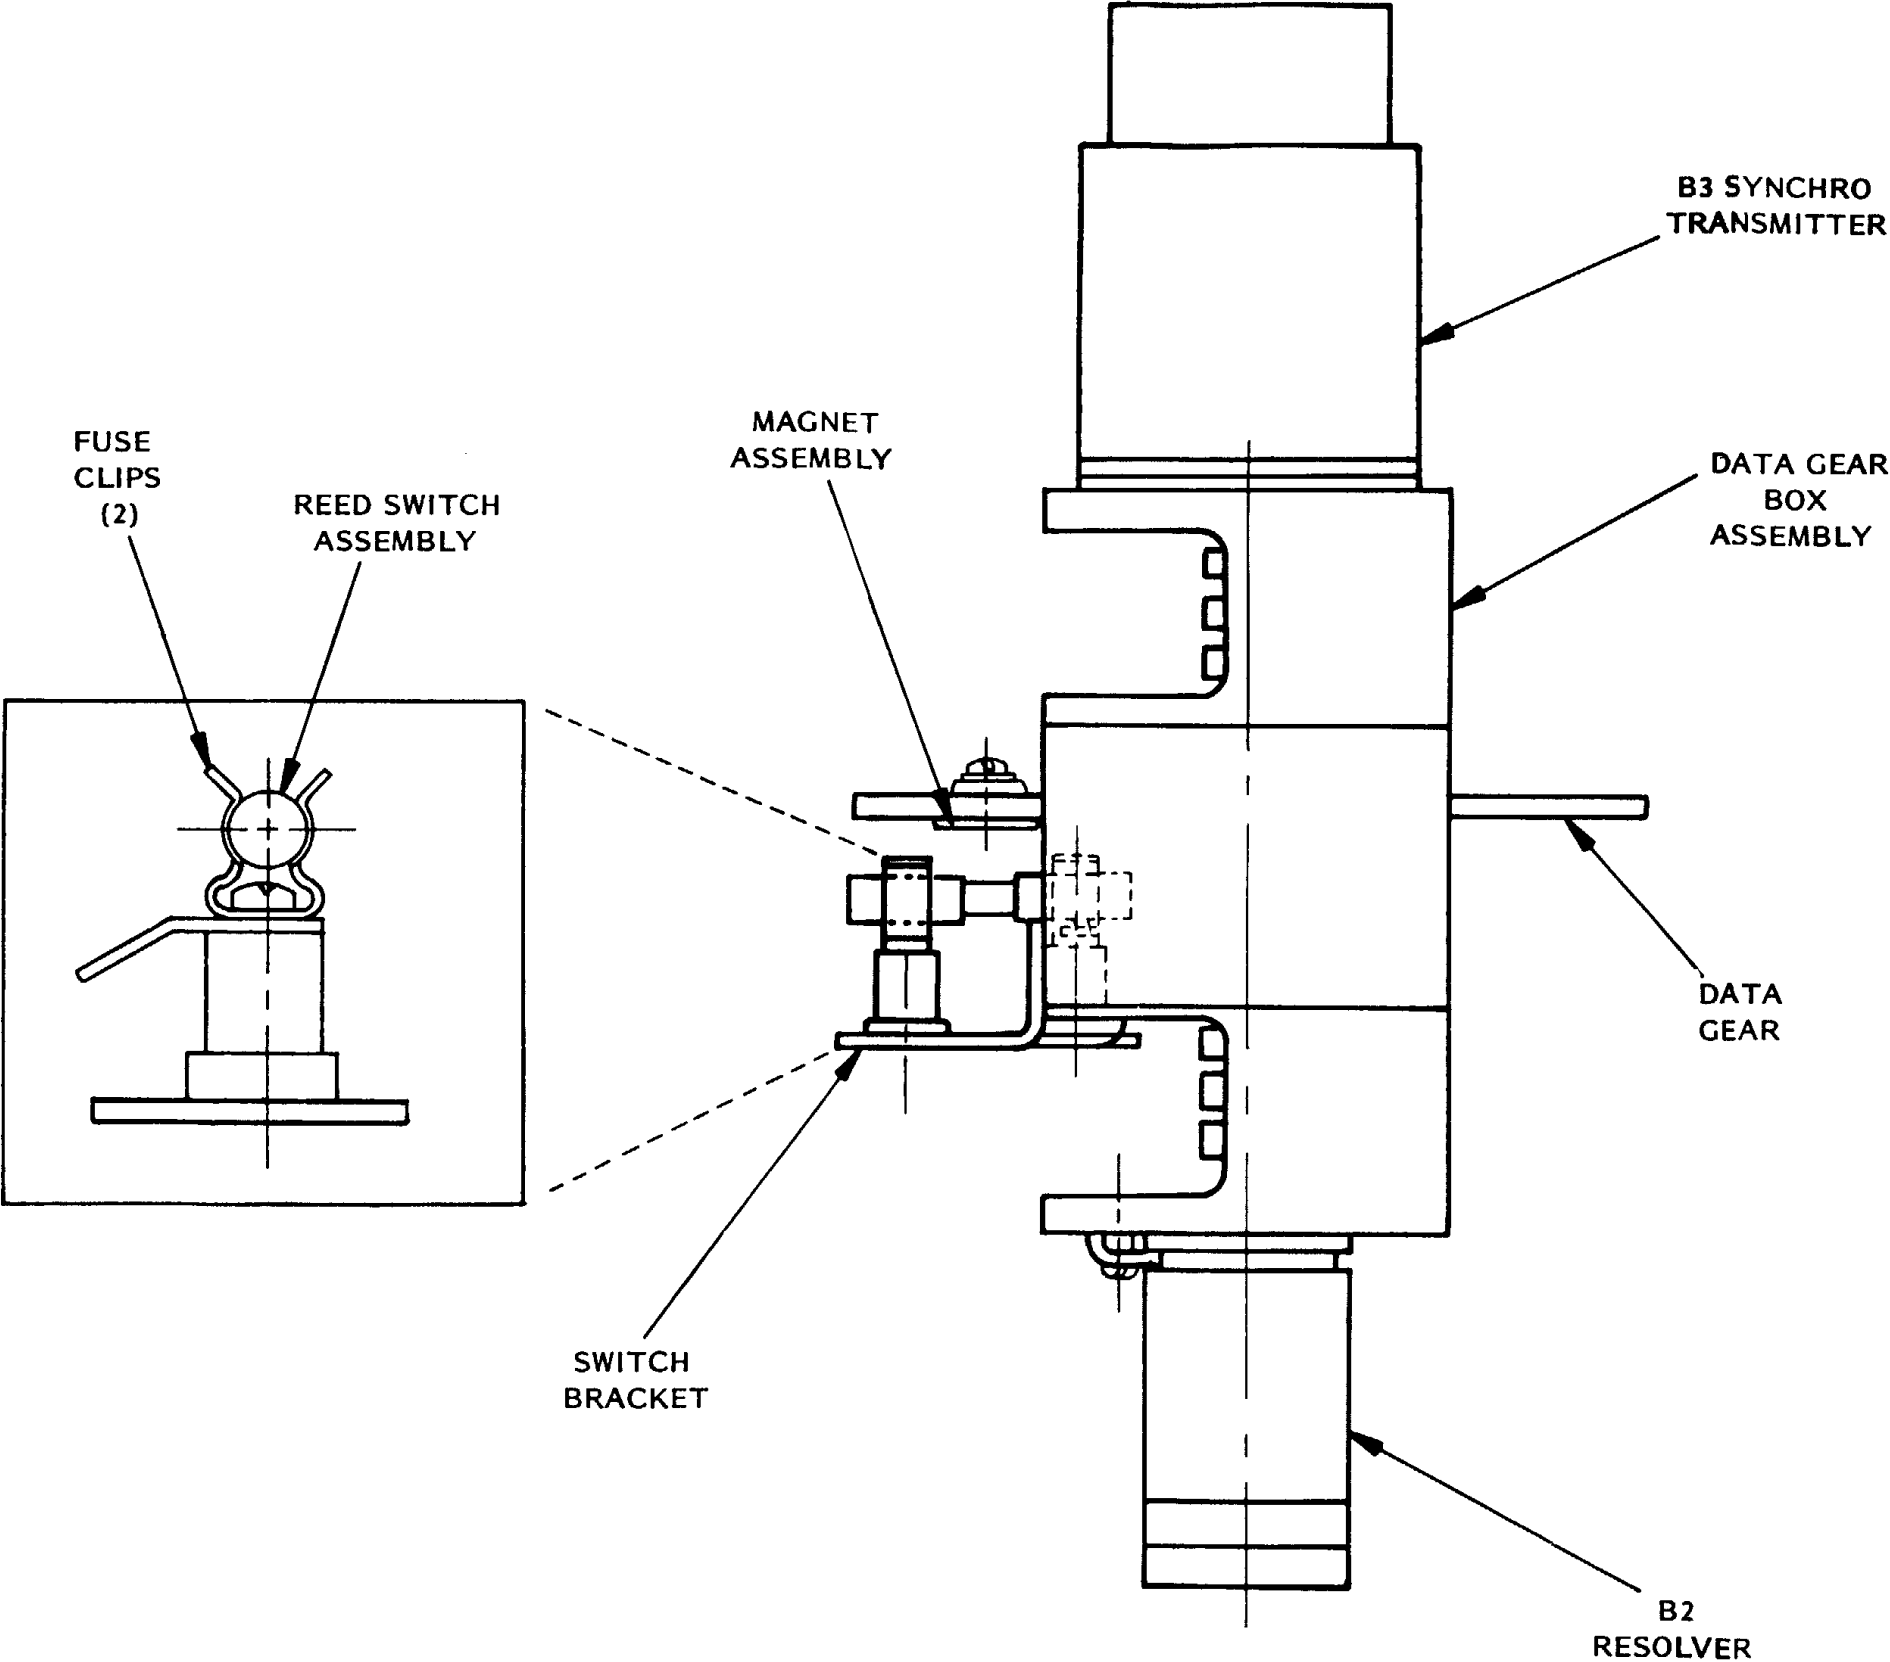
Data Gear Box Assembly Parts Location AB-1248
